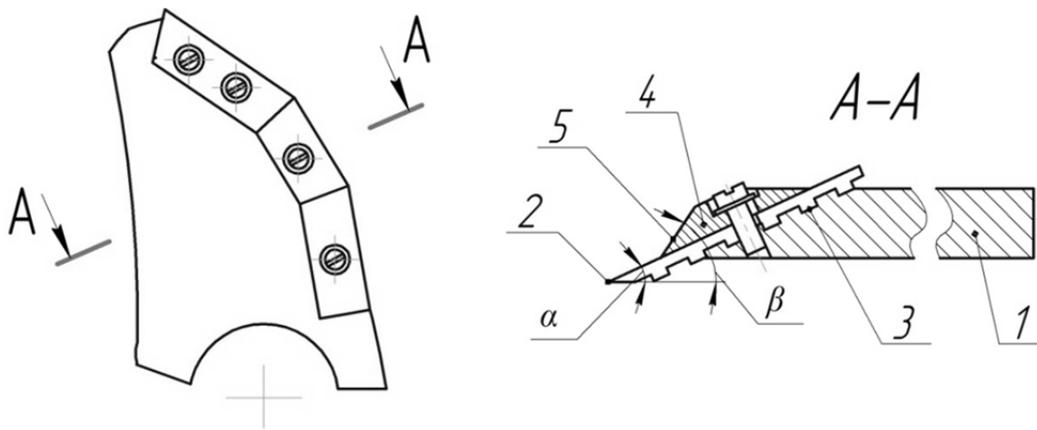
Knife for cooked sausage products: 1 – body; 2 – blade; 3 – teeth; 4 – overlay; 5 – dispersing surface.
